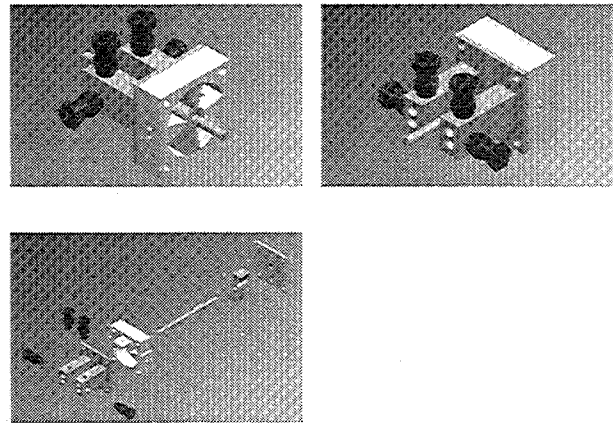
Conceptual design of 20W palm-sized MICSE core, showing cavity block, swing arm, shaft, back cover plate, intake valves and fittings. This design is for two-stroke operation to eliminate high-temperature exhaust microvalves.
